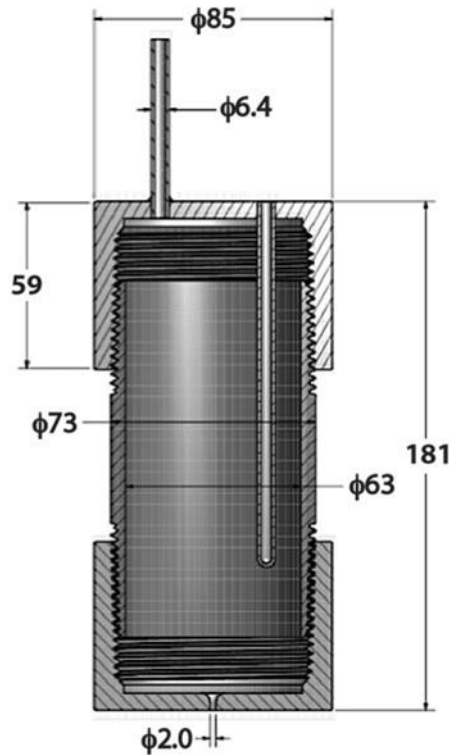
A mechanical drawing of the crucible assembly. Dimensions are in mm.
